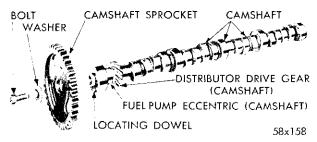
Camshaft and Sprocket Assembly (Exploded View)
